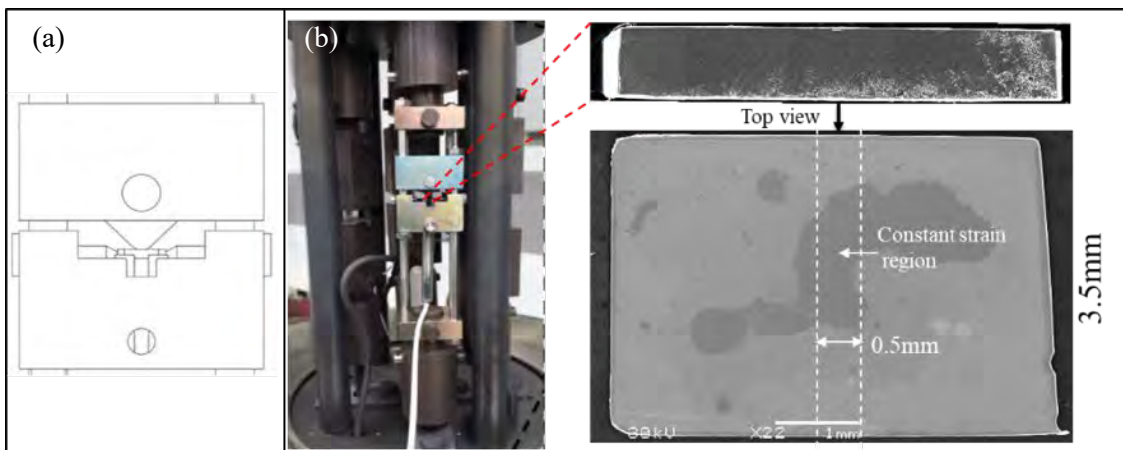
Schematic of the four-point bend loading fixture (a) and the real fixture including bend sample with side and top view (b).
